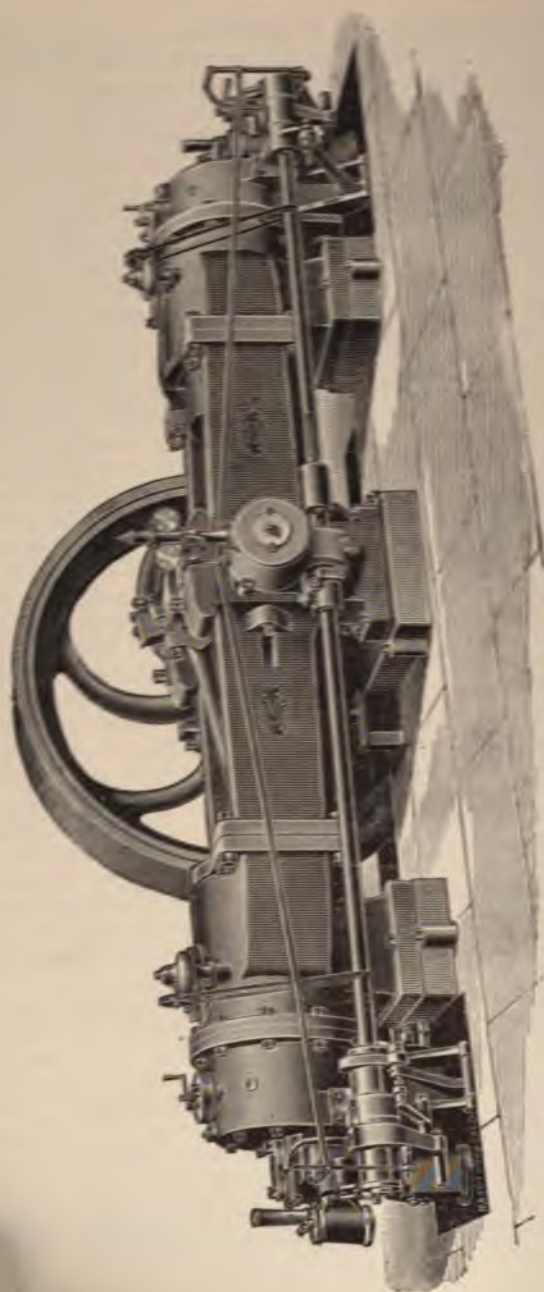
Otto-Crossley Engine. Two cylinders and one crank.
